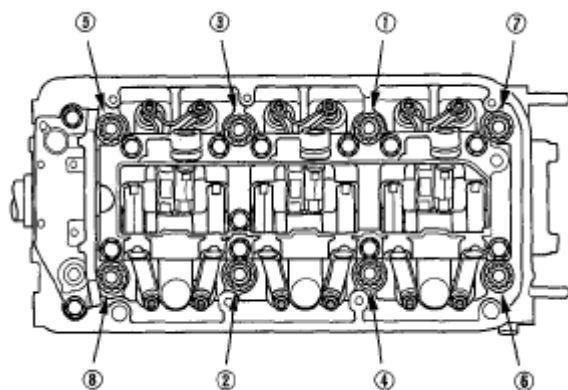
Identifying Cylinder Head Bolts Tightening Sequence - Front
